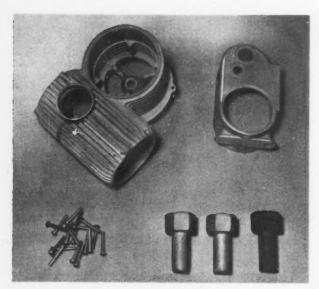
Some Examples of Components, Suitable for Treatment in the Barrel Vapour Blasting Machine, which would Otherwise be Difficult to Process Automatically
